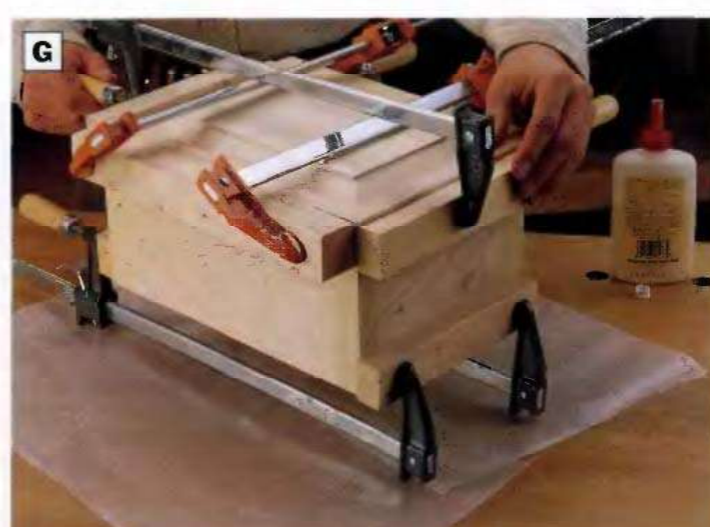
PHOTO G: Apply bar clamps across the box length and width to ensure tight miter joints. Wood cauls between the box and the clamp jaws will help distribute clamping pressure.
